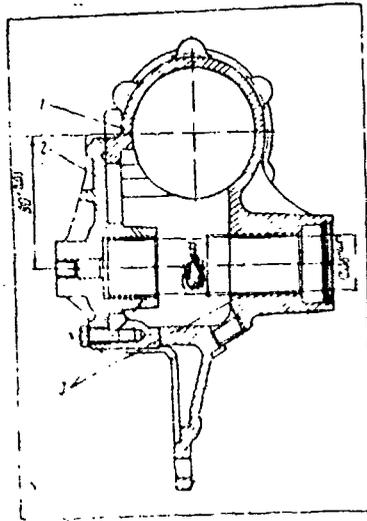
Steering mechanism housing together with the side cover, ZIL-130
